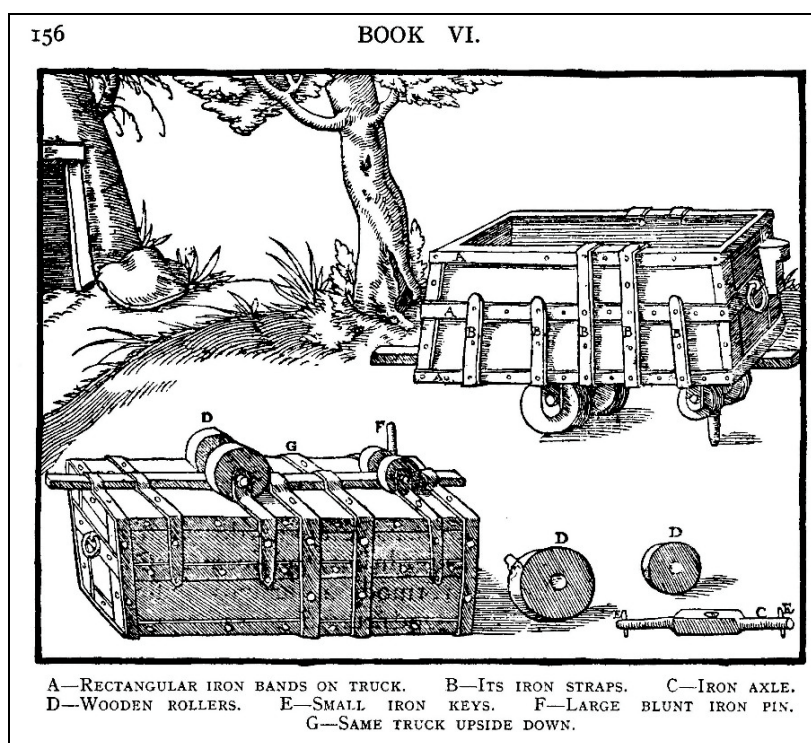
Examples of wooden waggons used in horizontal mine levels (Agricola 1556)
